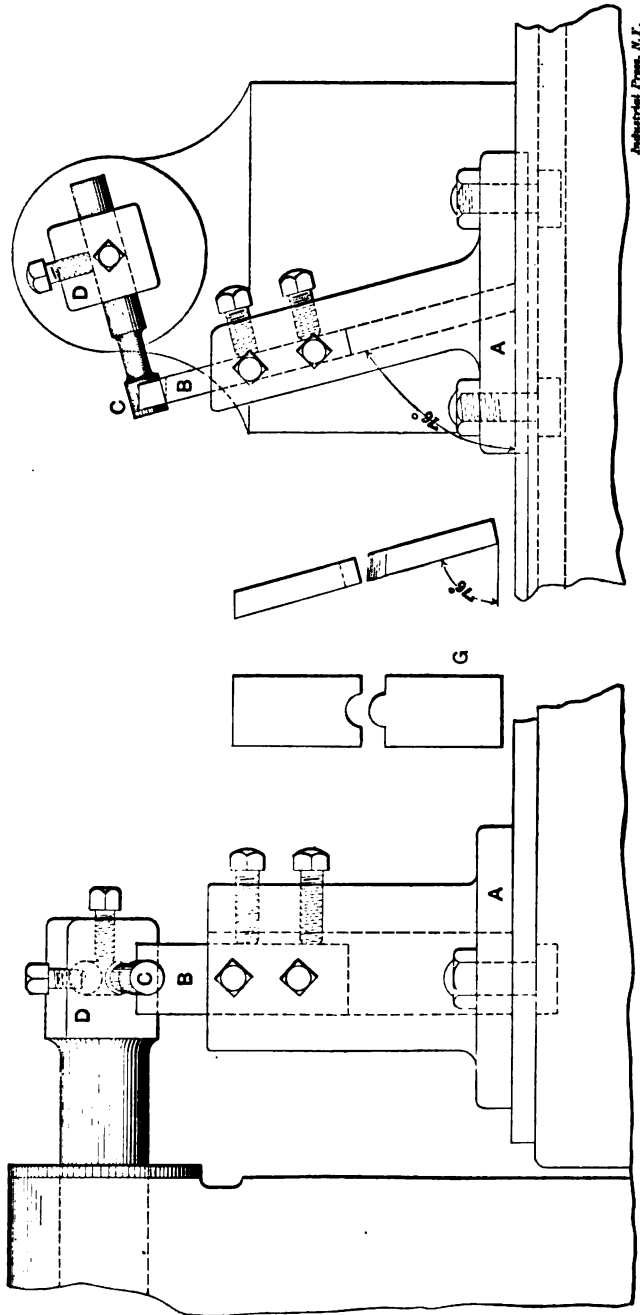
Making a Concave Forming Tool in the Milling Machine.
